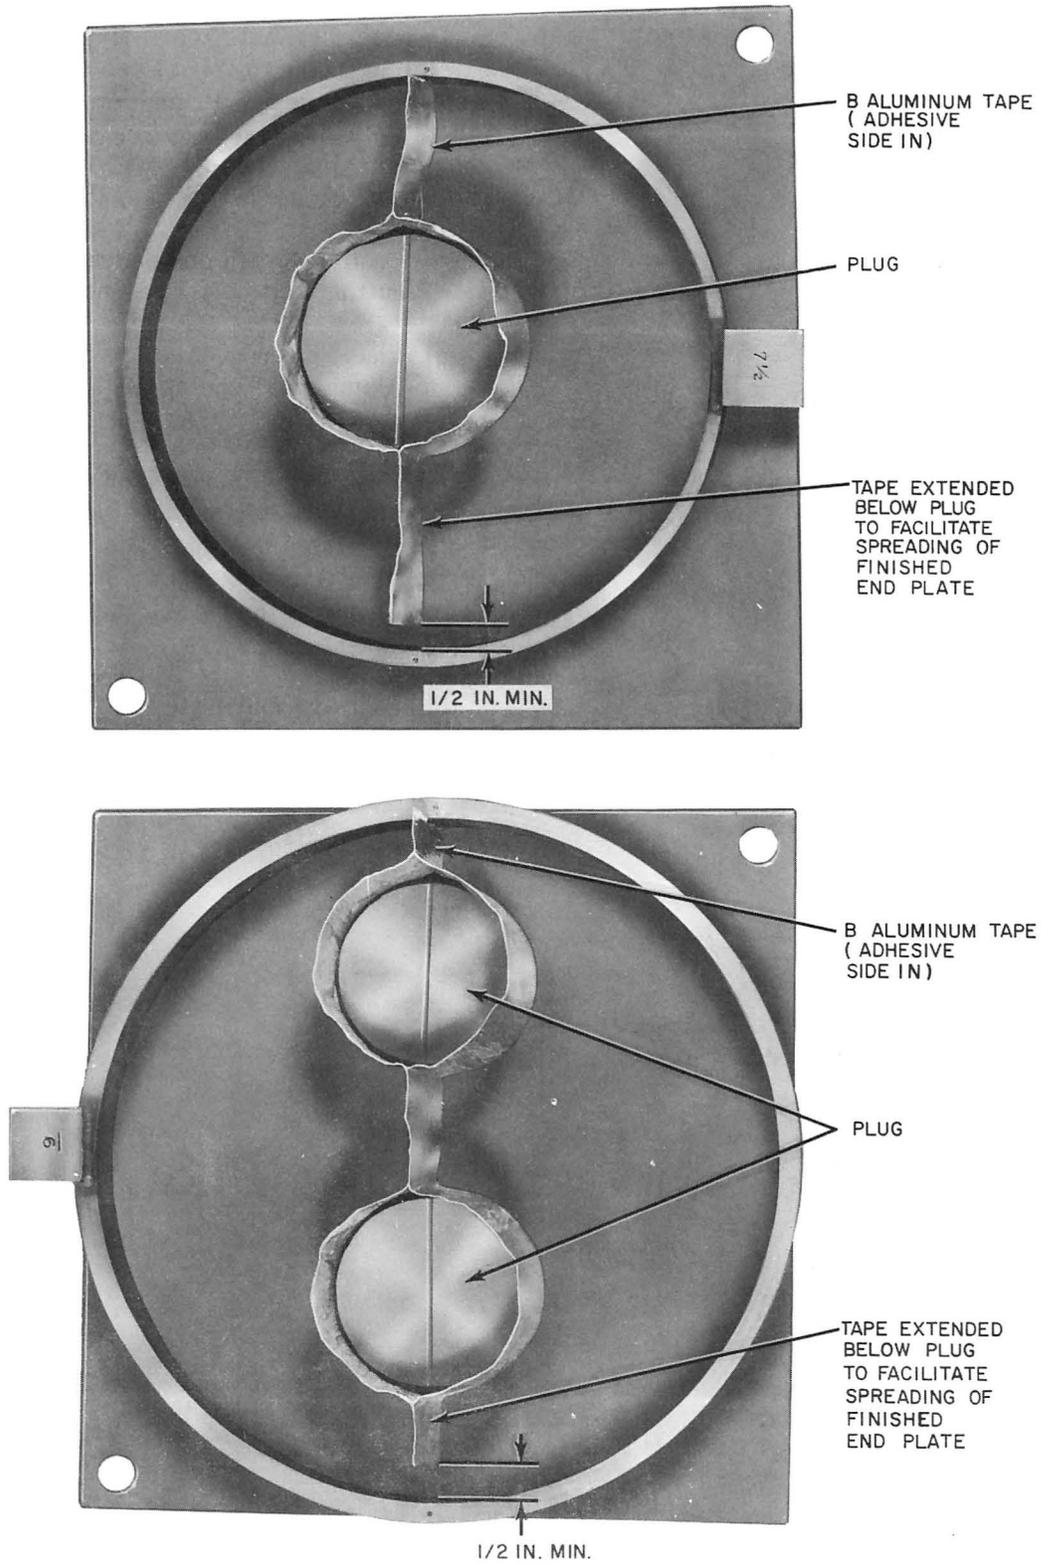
Core Plug and Mold Ring Assemblies and Multiple Opening End Plates
